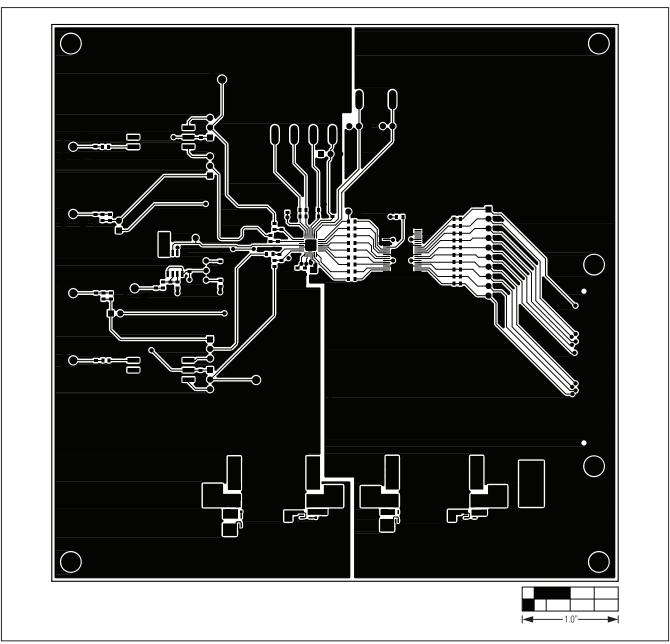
MAX19192 EV Kit PCB Layout—Component Side
